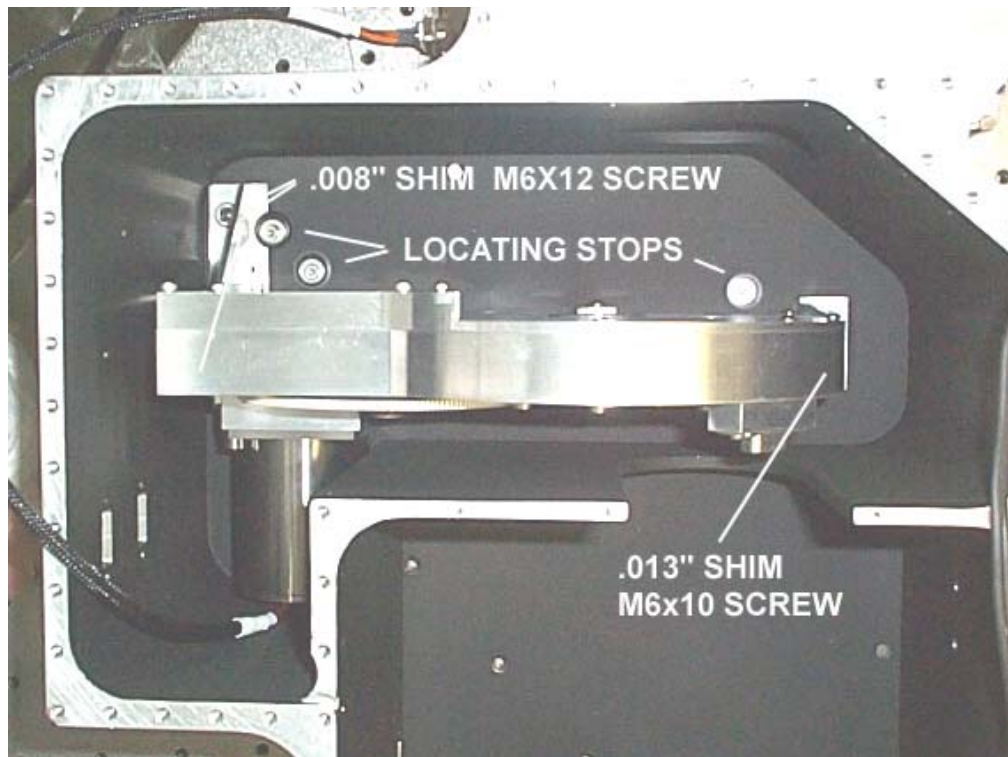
Filter Wheel Installed in OIWFS.
